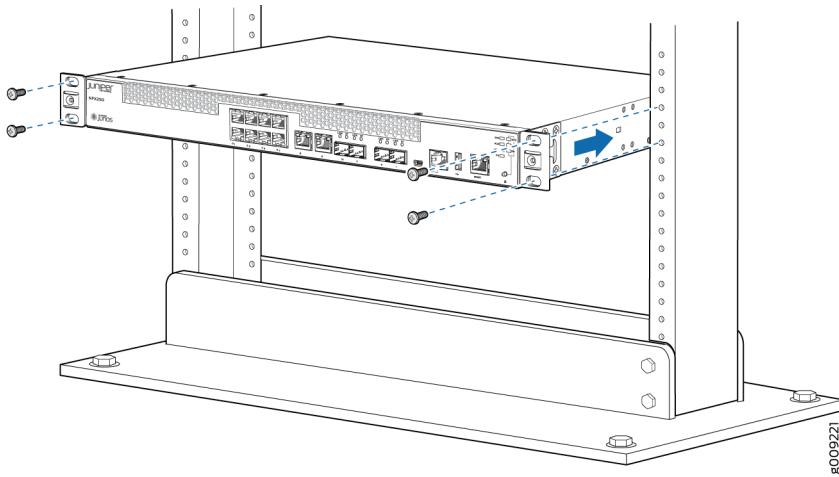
Attaching the Mounting Bracket to the Side Panel of the Device
